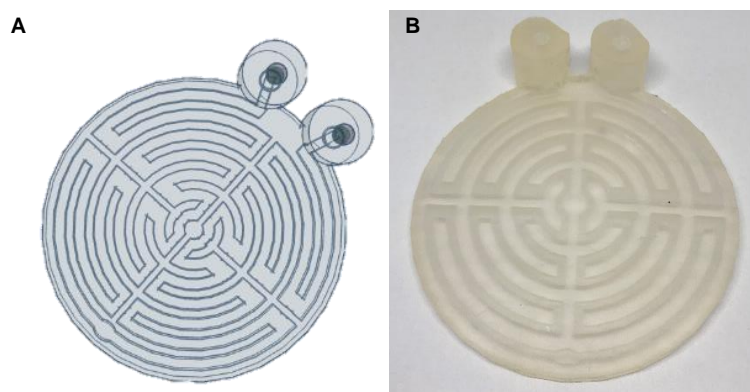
A) CAD drawing of circular hotplate reactor design 11; B) Printed circular hotplate reactor design 11.
